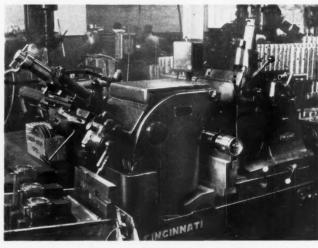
Grinding the piston lands and skirt on a Cincinnati interrupted through-feed machine
